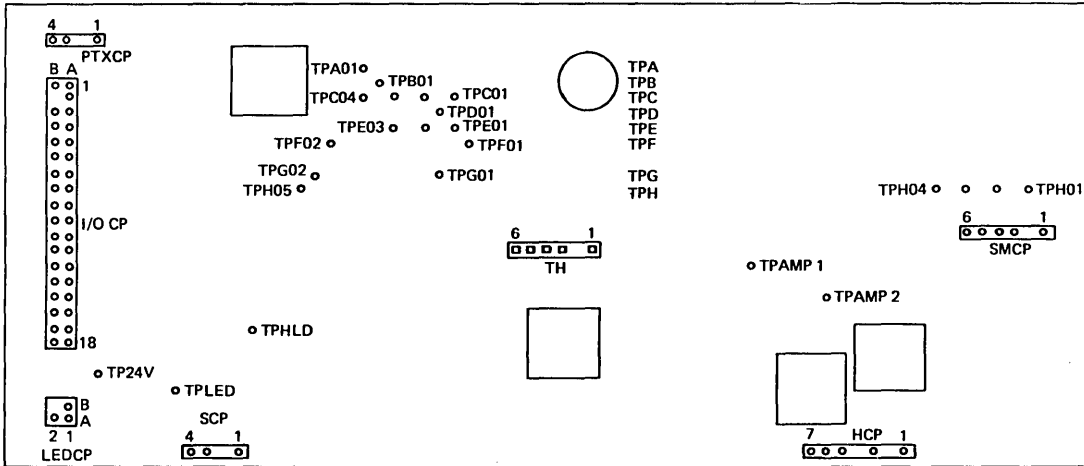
(Part 3 of 4). Diskette Drive Parts
